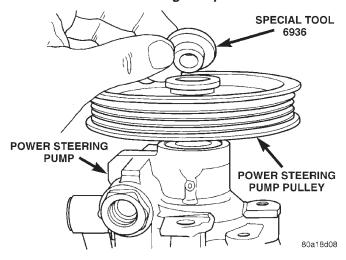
Special Tool 6936 Correctly Installed On Power Steering Pump Pulley
